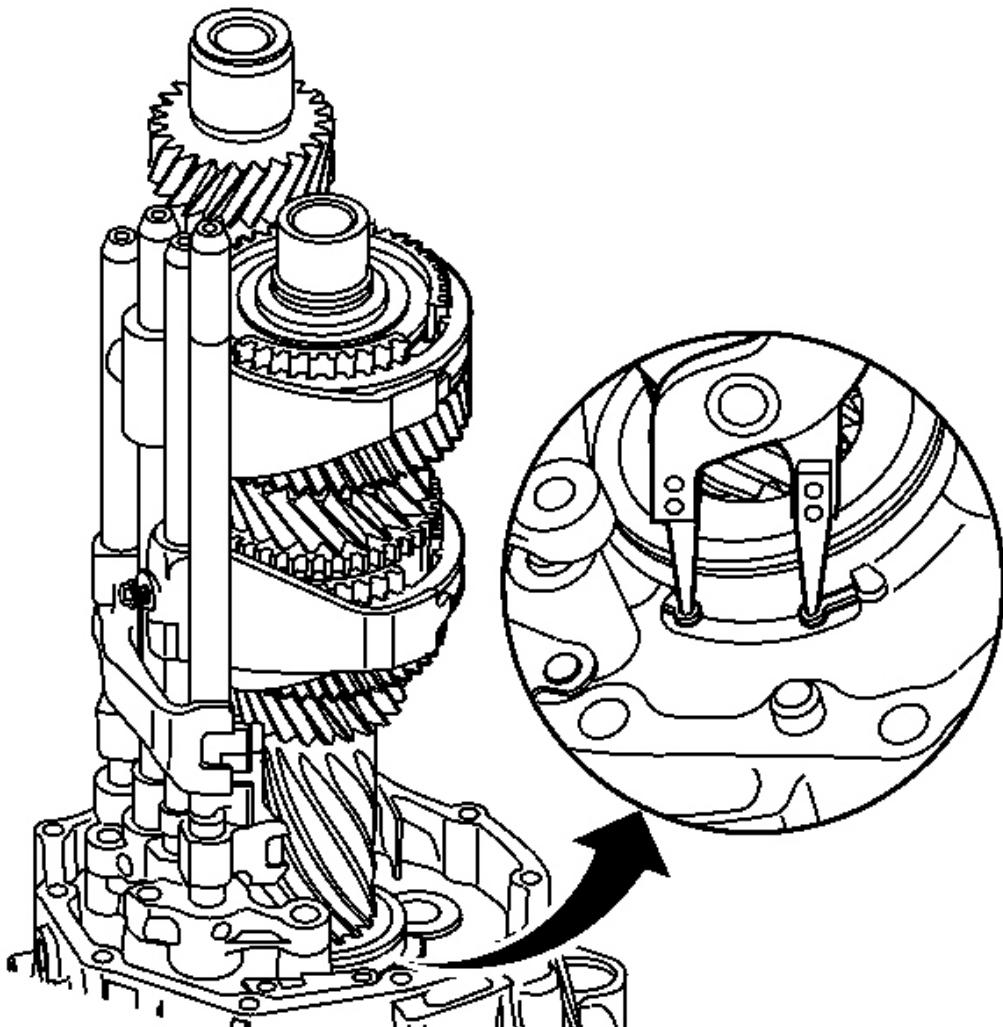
Holding Snap Ring On Rear Input Shaft Bearing
